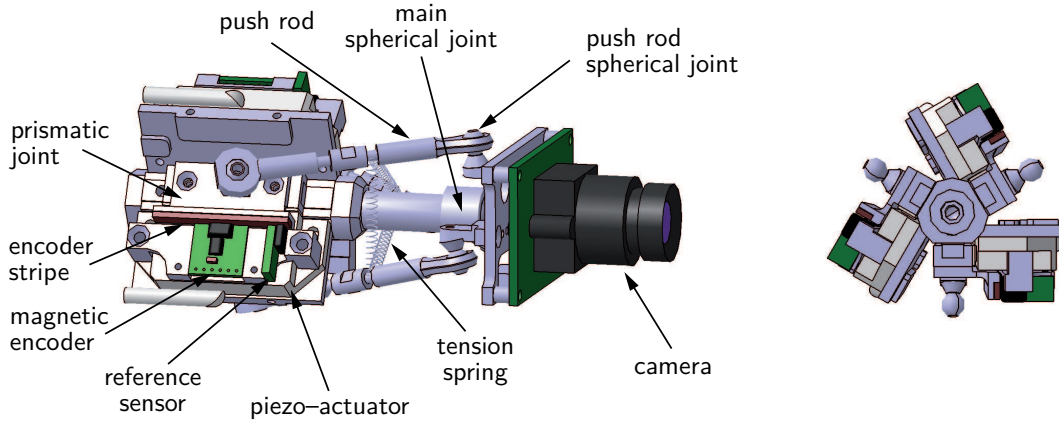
Assembly of the mechanical setup: camera orientation system (left), star-shaped actuator unit in detail (right).
